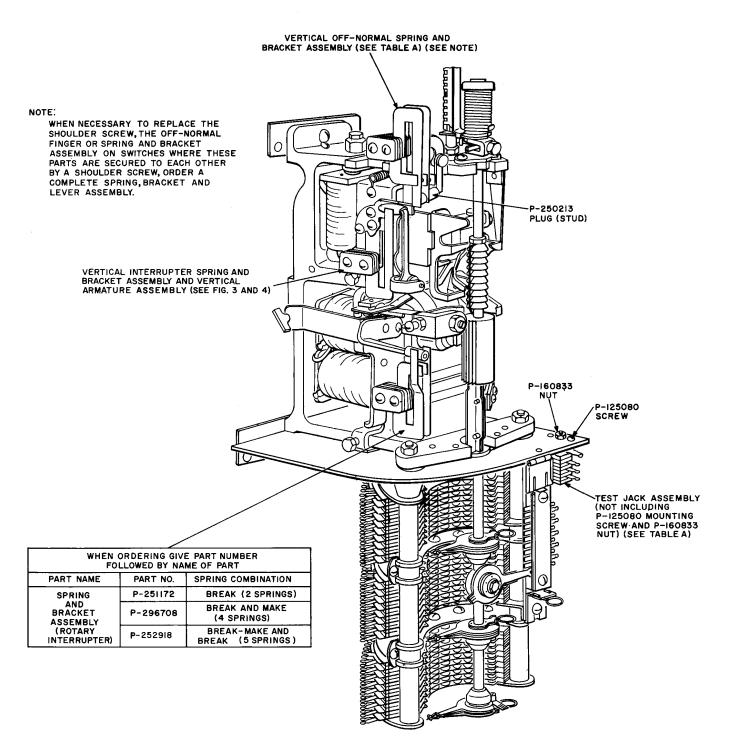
Contact Spring Assemblies, Test Jack Assemblies, and Associated Parts of 197-Type Switch as Viewed From the Left Side
